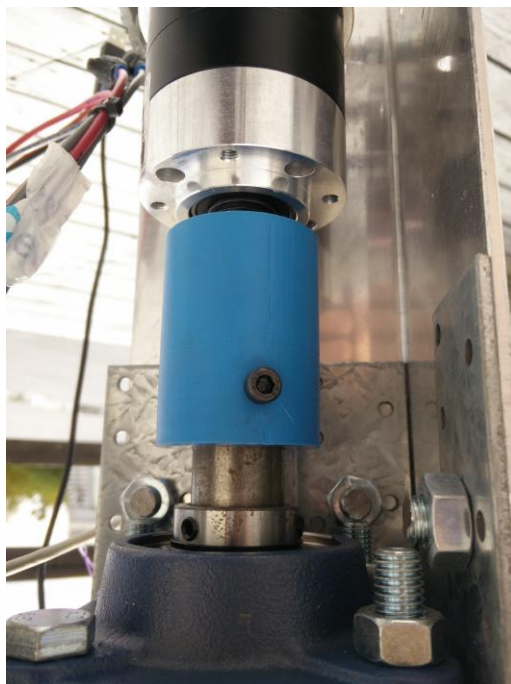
3D-printed plastic tube connecting the motors to the structure.
